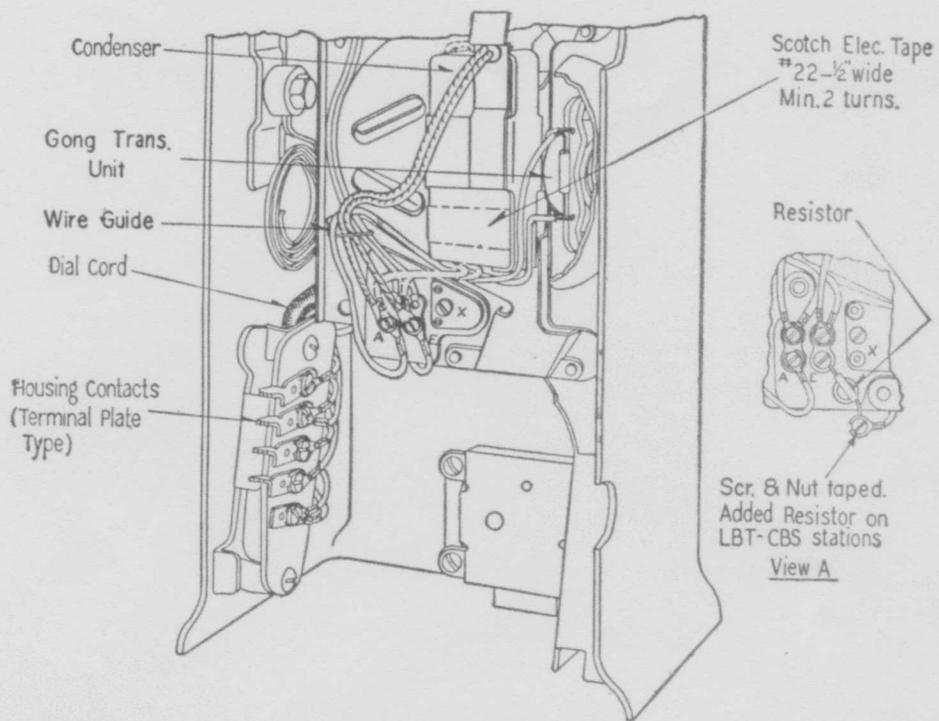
176 or 178-type, or D-178942 Coin Collector—Upper Housing
